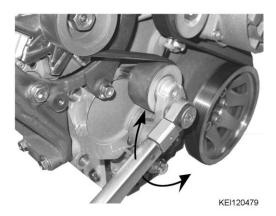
V-ribbed belt for alternator drive with A/C compressor
